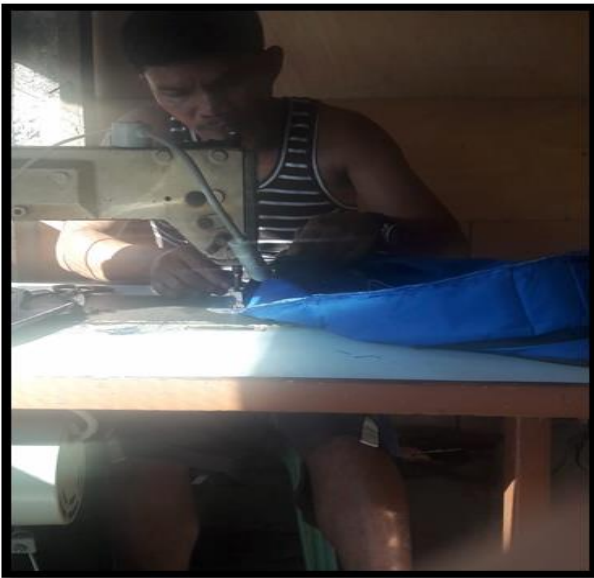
The bag maker sewing the inner side of the bag to make it more durable.
